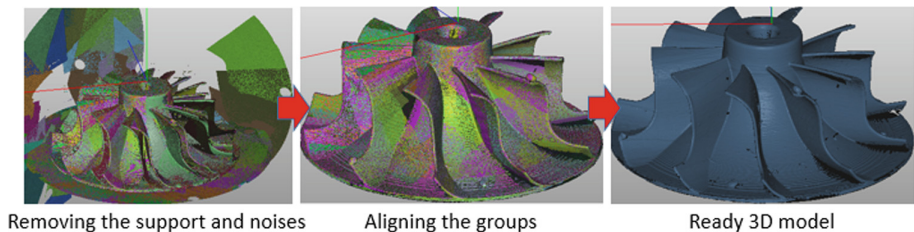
The manufacturing process of turbine impeller using 3D printing.
